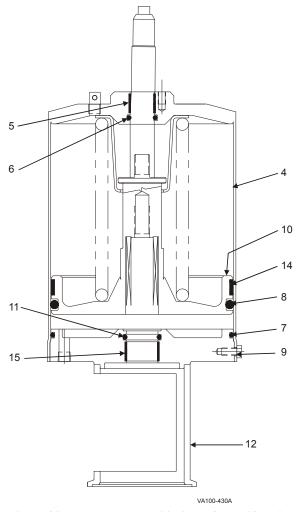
Actuator Assembly (Non-Seat Lift Valve)
